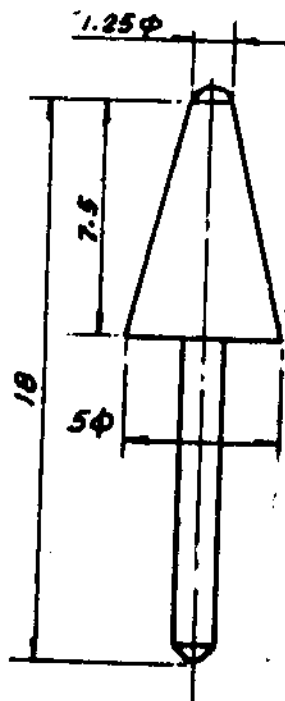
SHANK OF SCRATCH TEST NEEDLE
